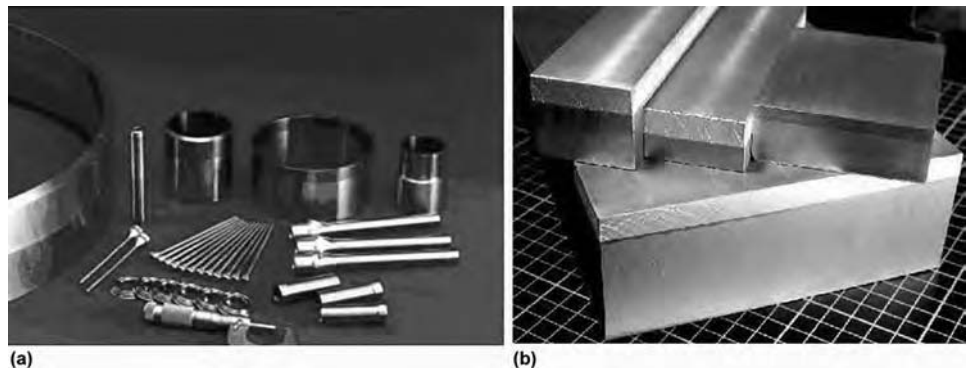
Transition joints for joining dissimilar metals. (a) Tubular transition joints for welding dissimilar-metal pipes and tubes. (b) Transition joint blocks for dissimilar-metal electrical connections
